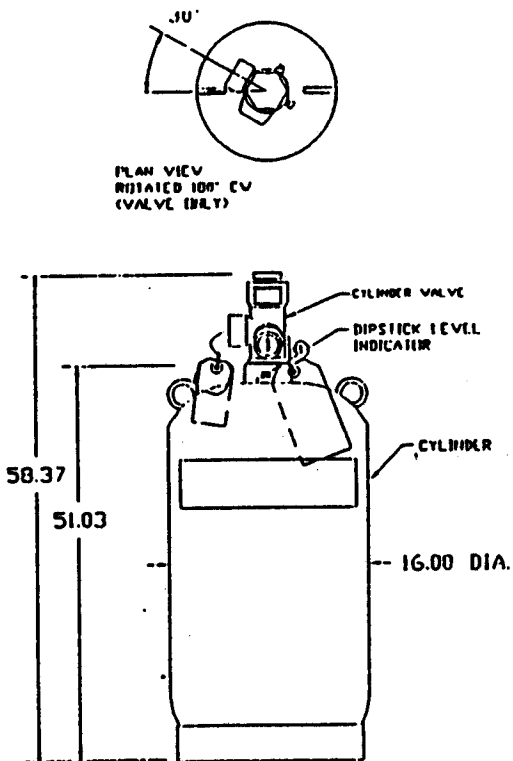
Halon 1301 Cylinder/Valve Assembly, 350 lb., with Liquid Level Indicator
